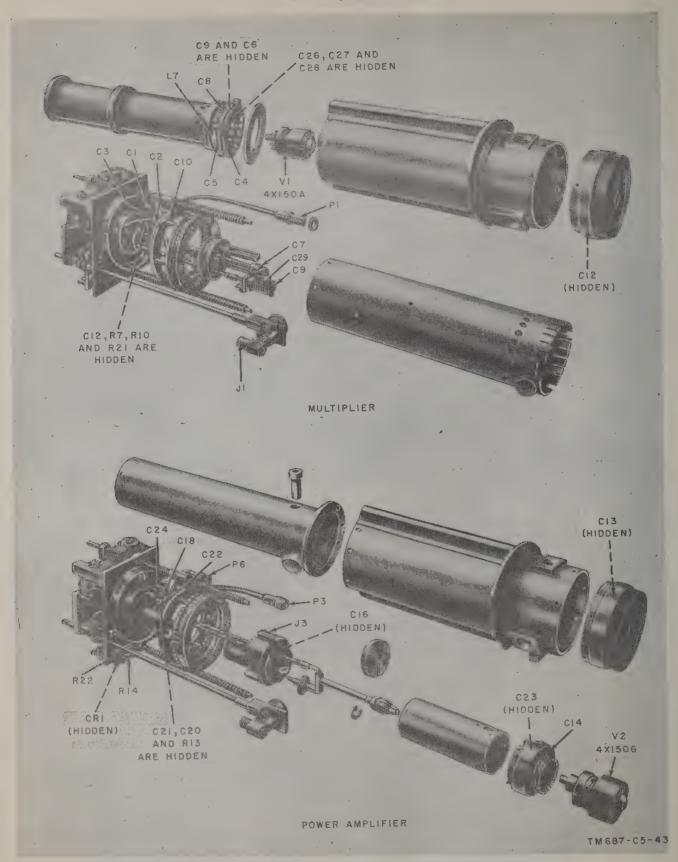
(Added) Transmitter D-band tuner cavities, exploded view.
